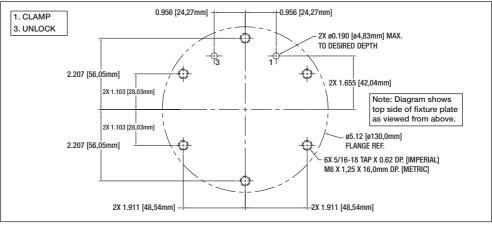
, Mounting Dimensions, Models MPFS-200V, WPFS-200V
